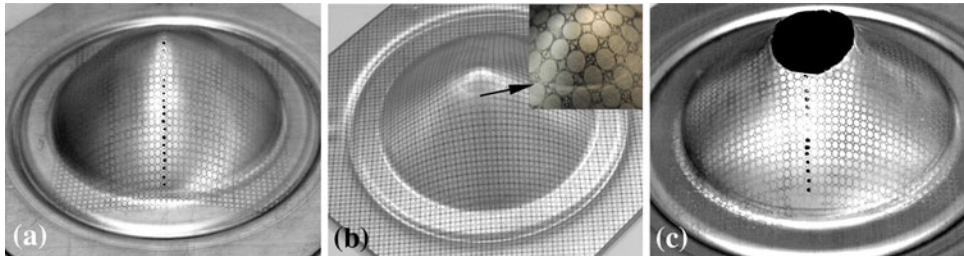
Typical states of deformed samples: (a) safe, (b) necking, and (c) fracture
